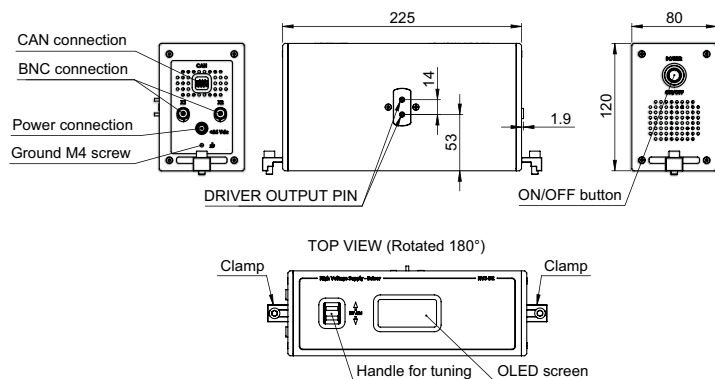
Outline drawing of encased type HVS-D2 driver with HV power supply
